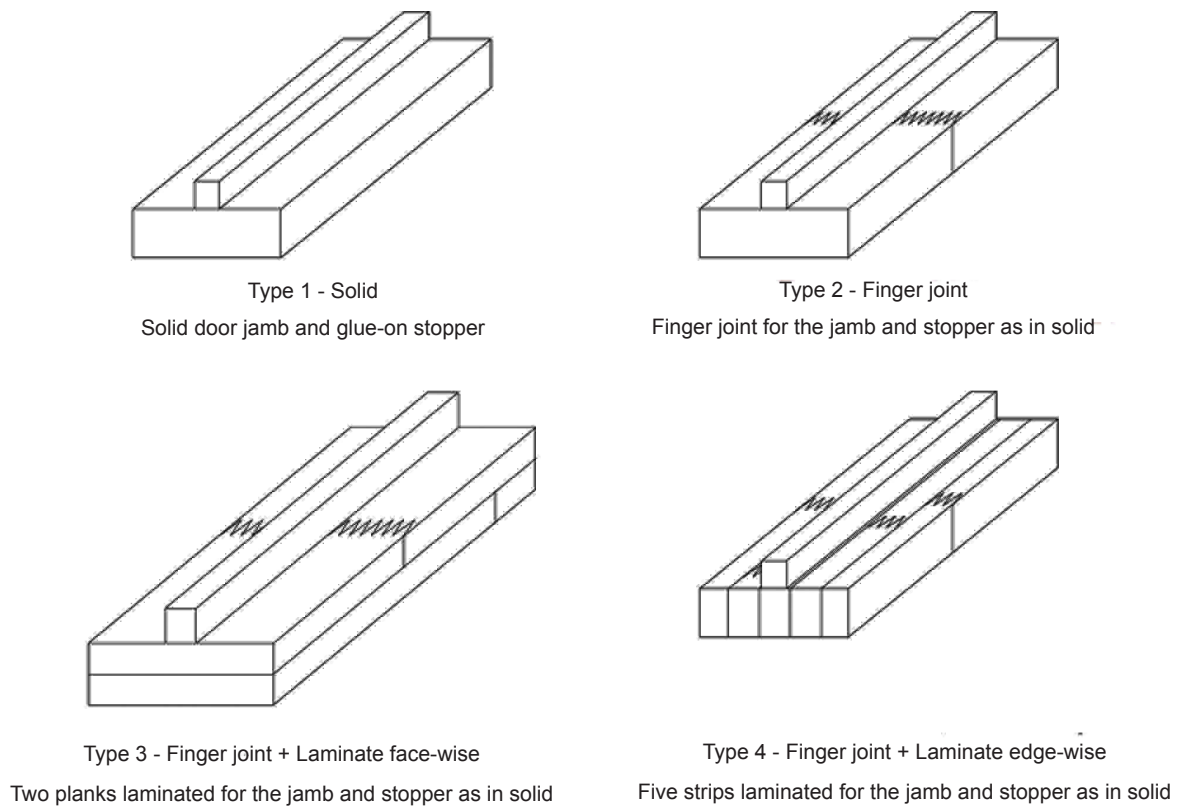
Types (1, 2, 3 and 4) of door jamb profiles
